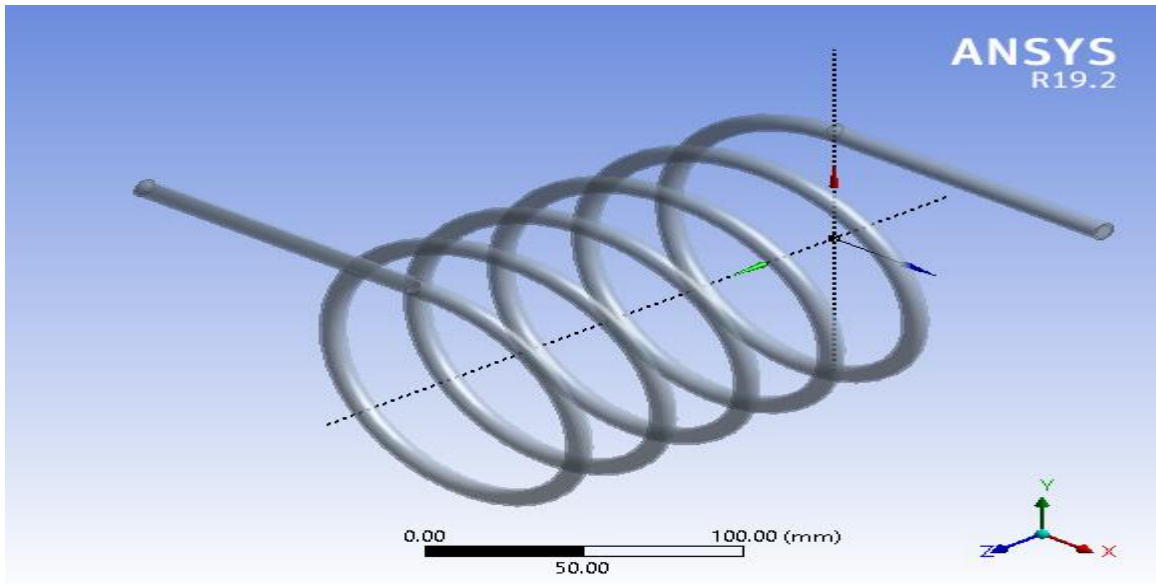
Schematic cut-away view of a helical tube heat exchanger
